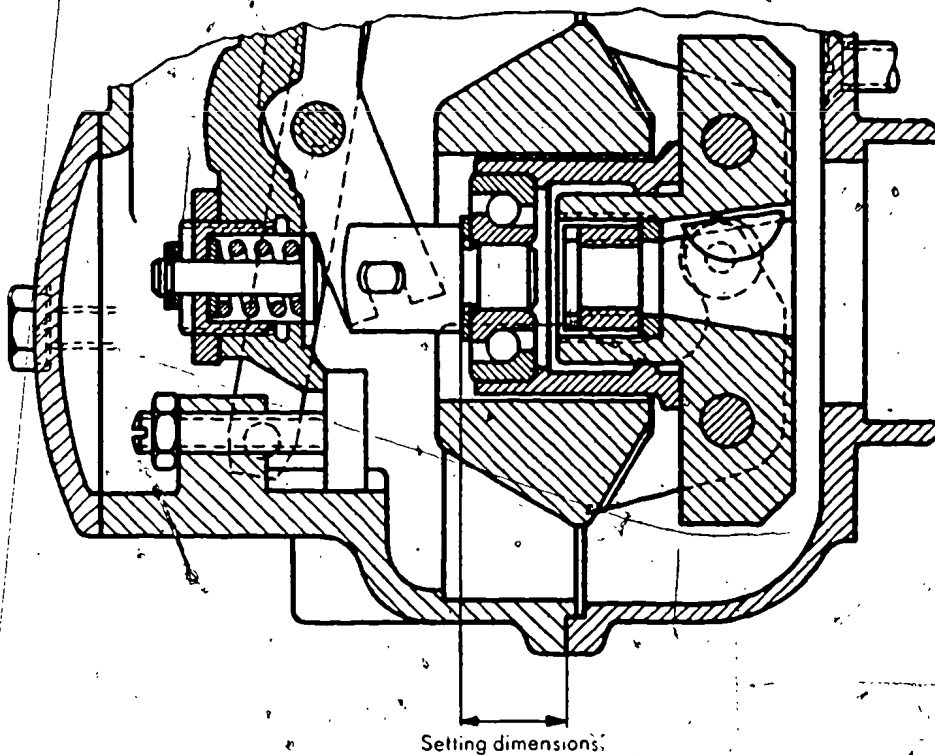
Setting dimension = distance from contact face of knuckle to contact face of housing cover
